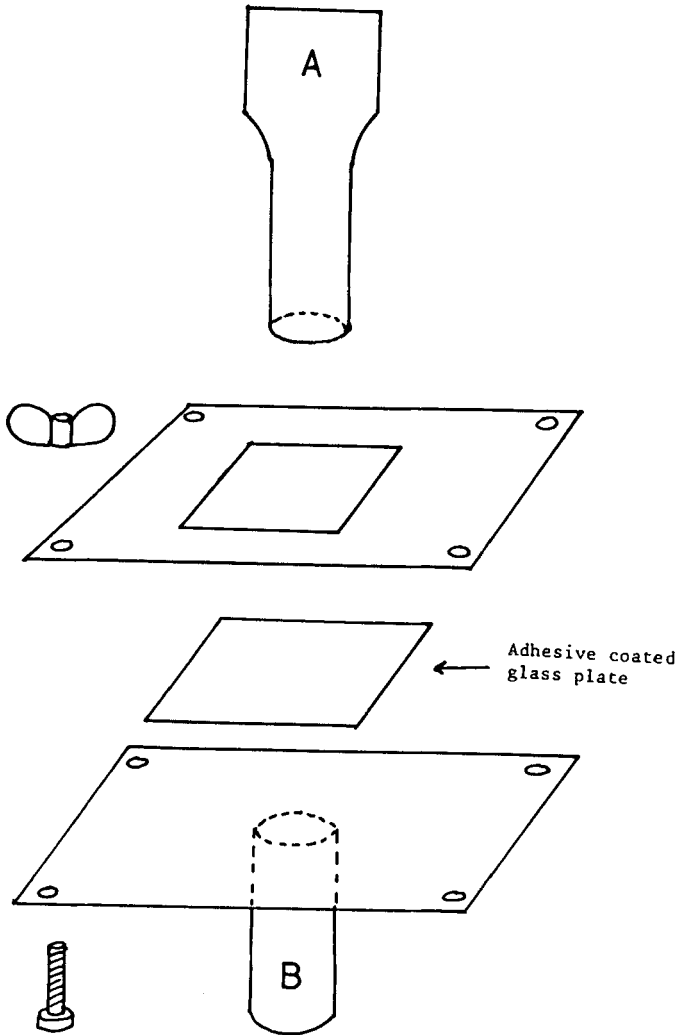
Adhesion testing jig. The mild steel plates bolt together to hold the glass plate, and parts A and B are clamped into the Instron.
